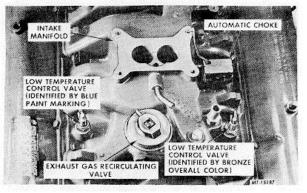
Removing Low Temperature Vacuum Control Valves, Exhaust Gas Recirculating Valve and Automatic Choke
